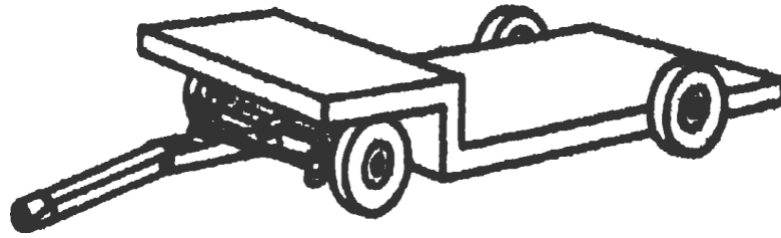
DROP FRAME TRAILERS, SINGLE DROP FRAME
